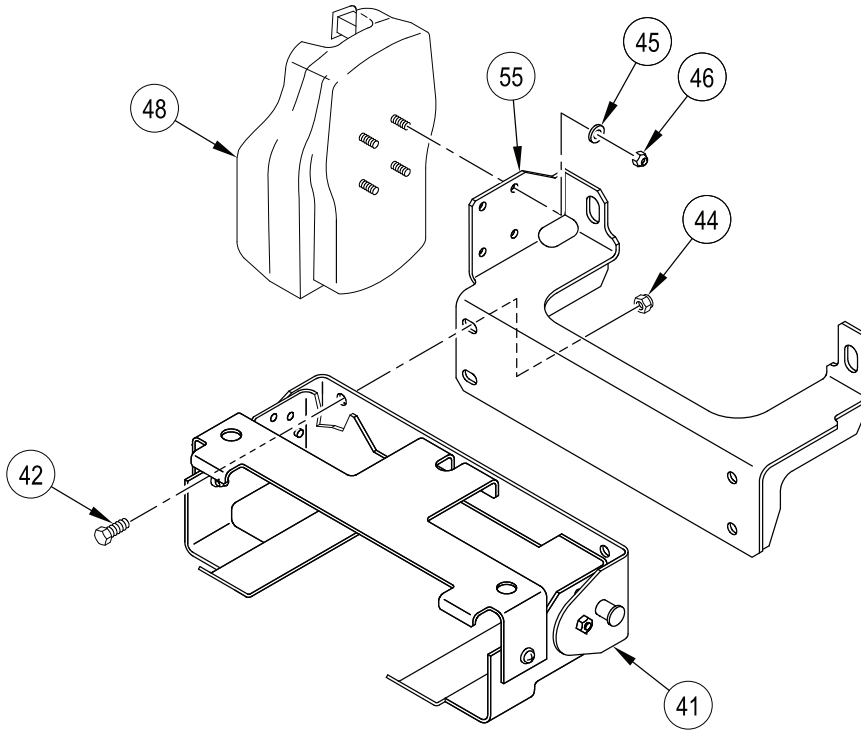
RCU/PDA Bracket Assembly (M577A3 Only)
